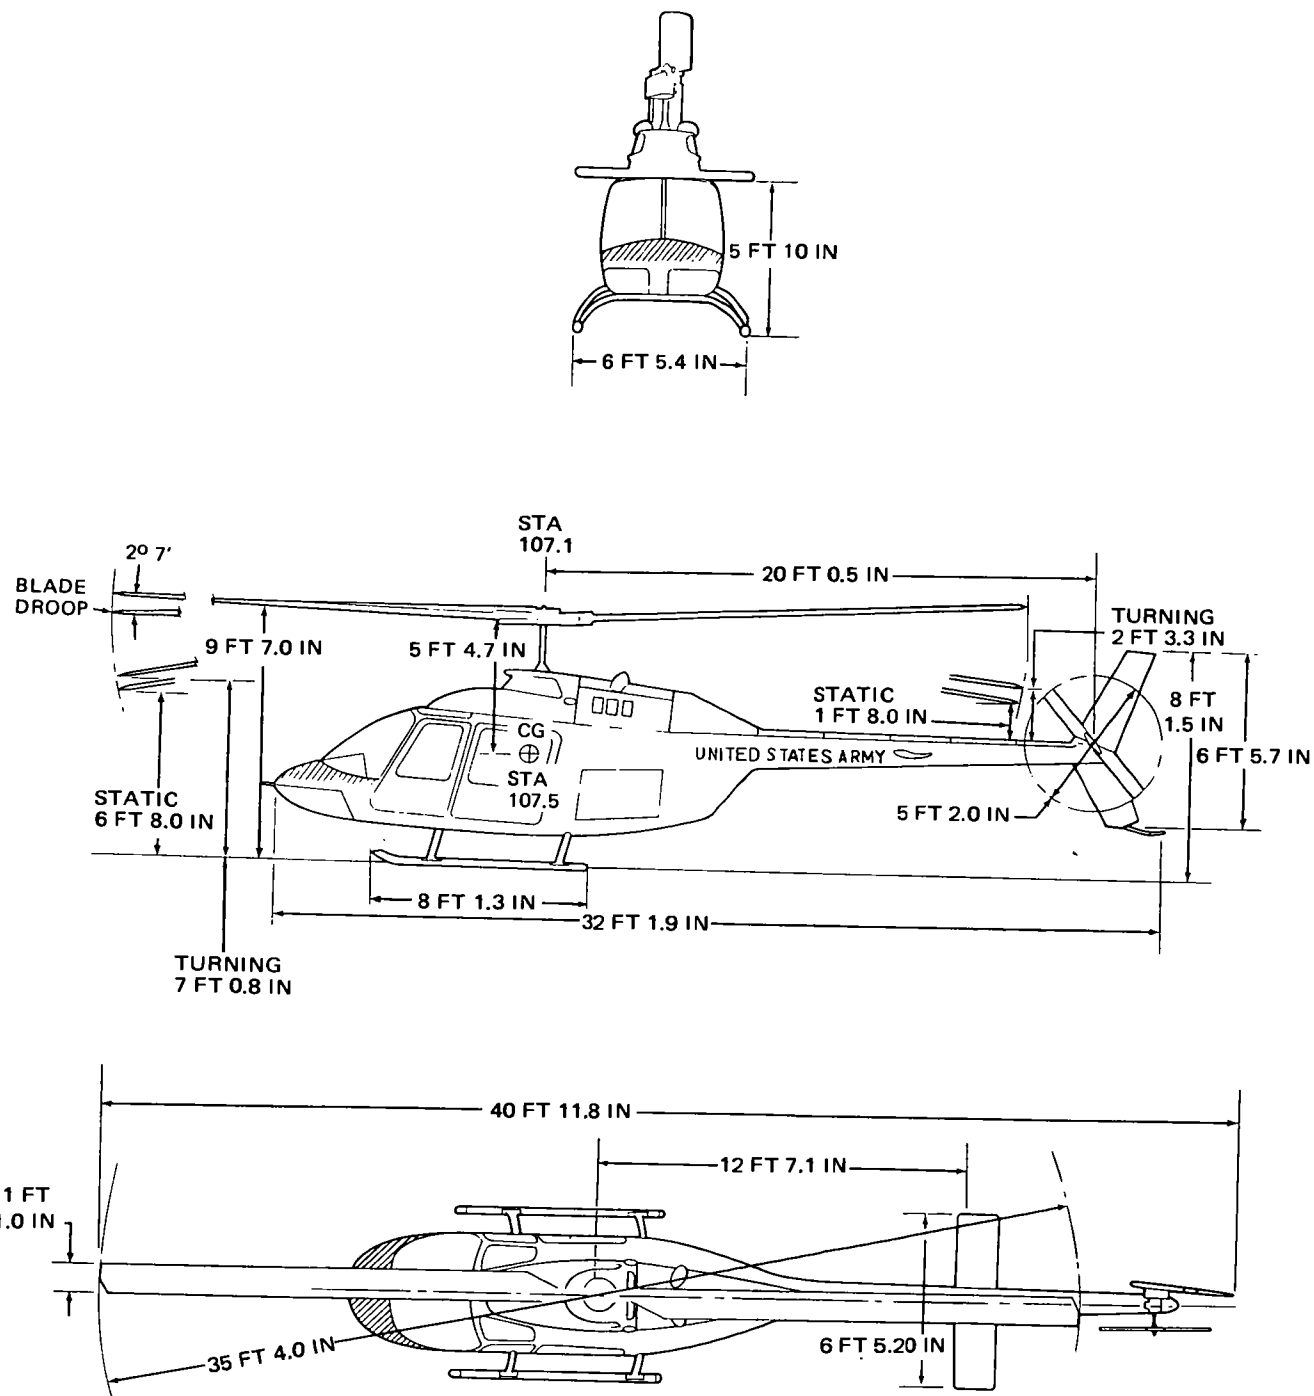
Principal dimensions, OH-58A (Kiowa)
